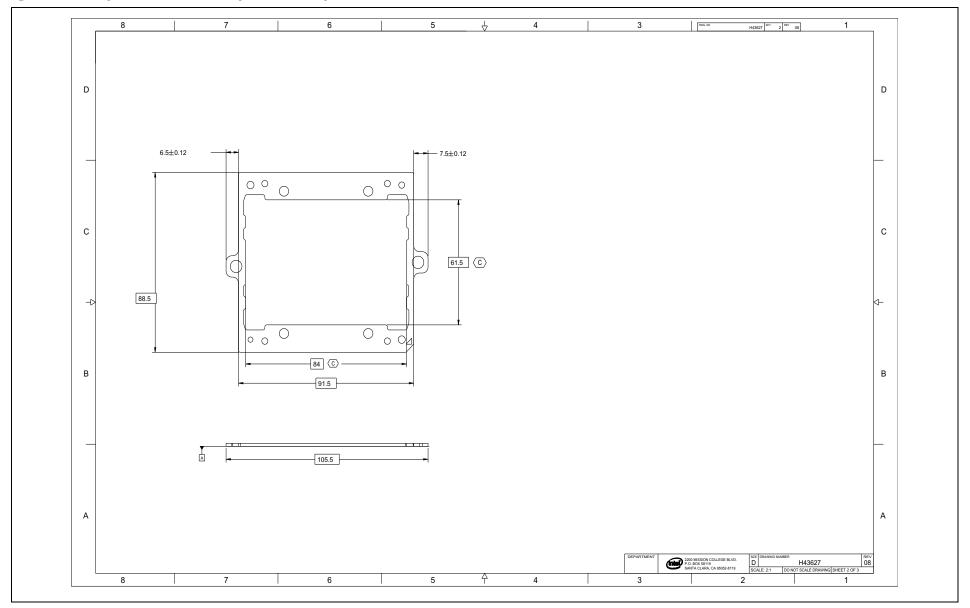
Square Bolster Plate (Sheet 3 of 3)
